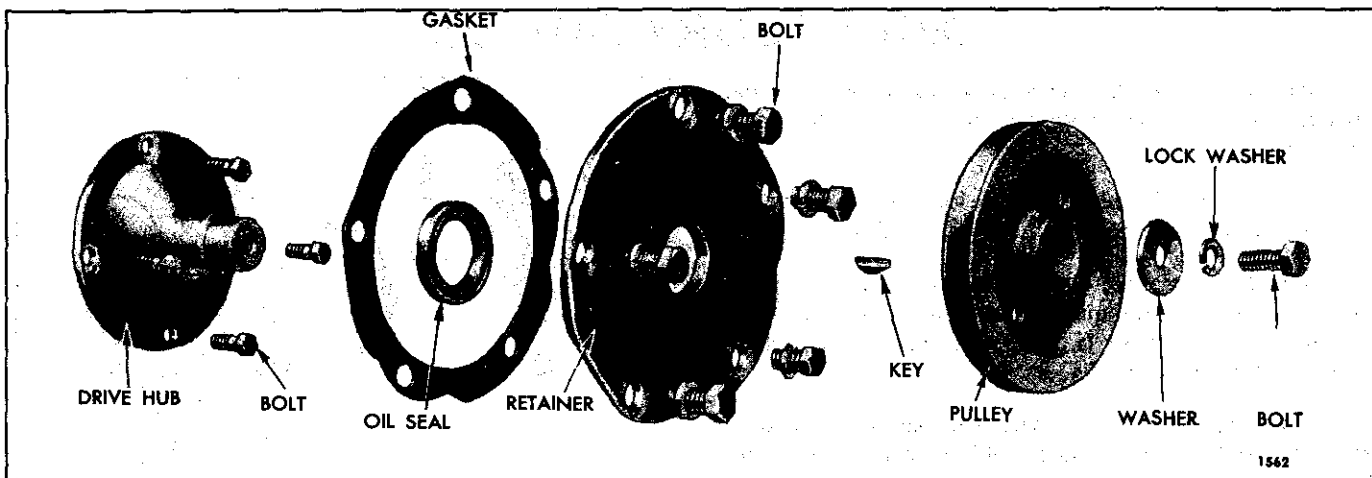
Components of Accessory Drive for Belt-Driven Accessory (Drive Hub Type)
